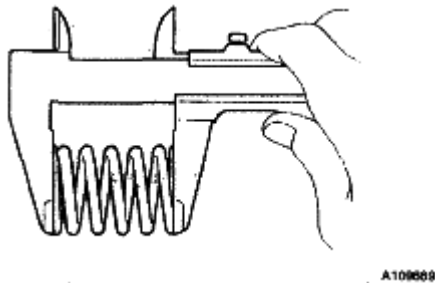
Measuring Free Length Of Compression Spring Using Vernier Calipers
